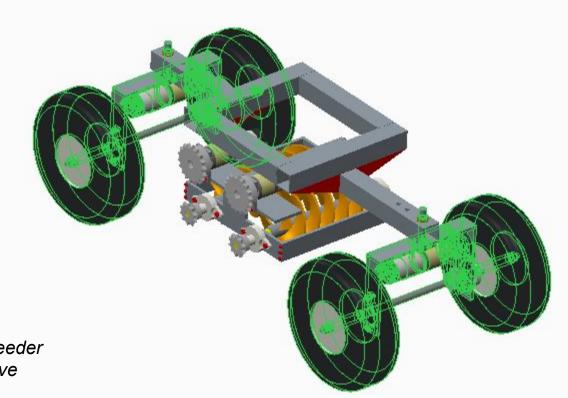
Robo-Weeder with Highlighted Drive Mechanism.
